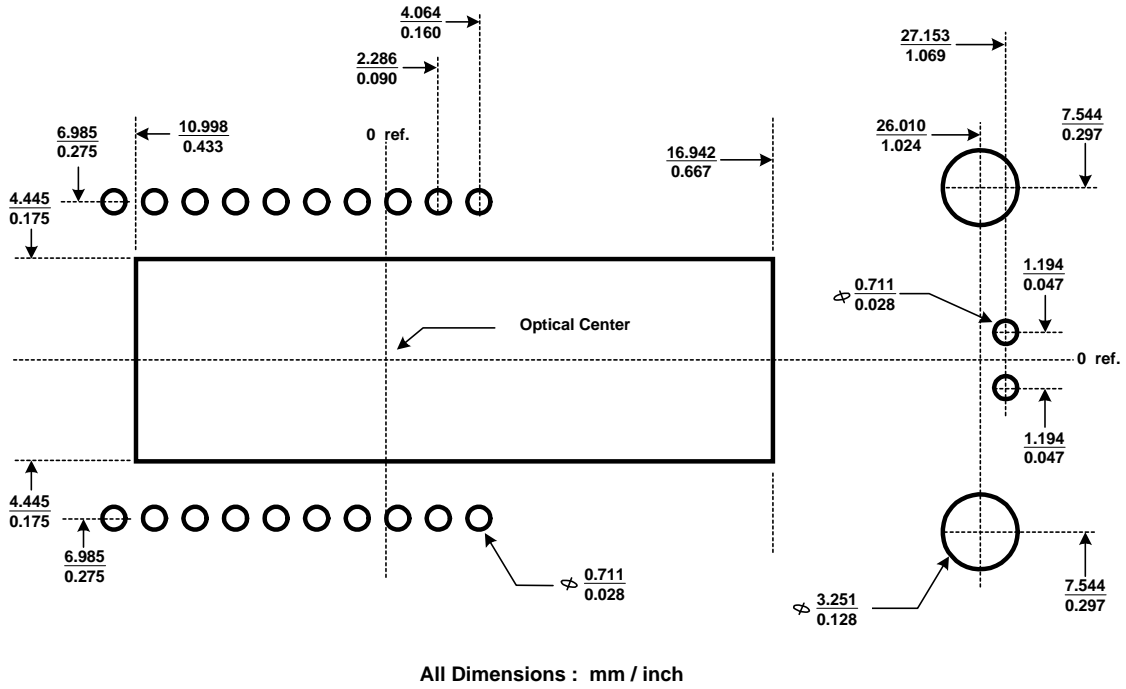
Recommended PCB Mechanical Cutouts and Spacing
